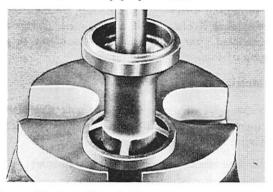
Installing Roller Bearing to Carrier Ass'y E. Installation of Bearing Carrier
